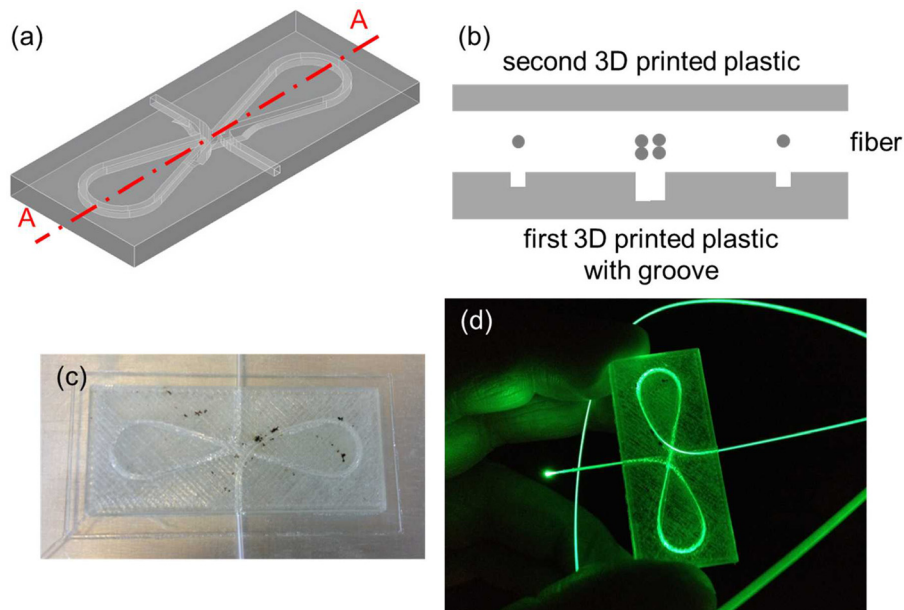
(a) 3D CAD model of the first optical device without the fiber. (b) Schematic diagram of the exploded cross-sectional view of Section A–A depicted in (a) with the fiber. The first 3D printed optical device with embedded Corning[®] Fibrance[™] Light-Diffusing Fiber (c) was not and (d) was lit up using a green laser pointer.
